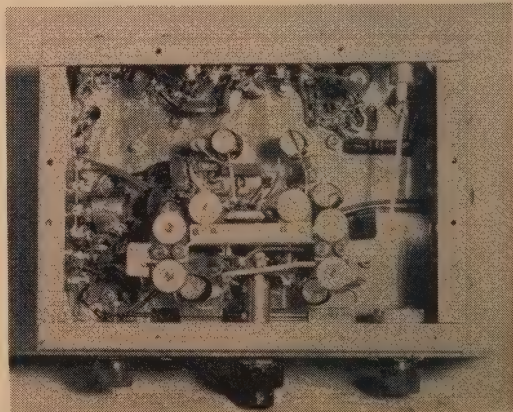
Bottom view of receiver section showing placement of the major components may be seen in the layout diagram of Figure 70.
